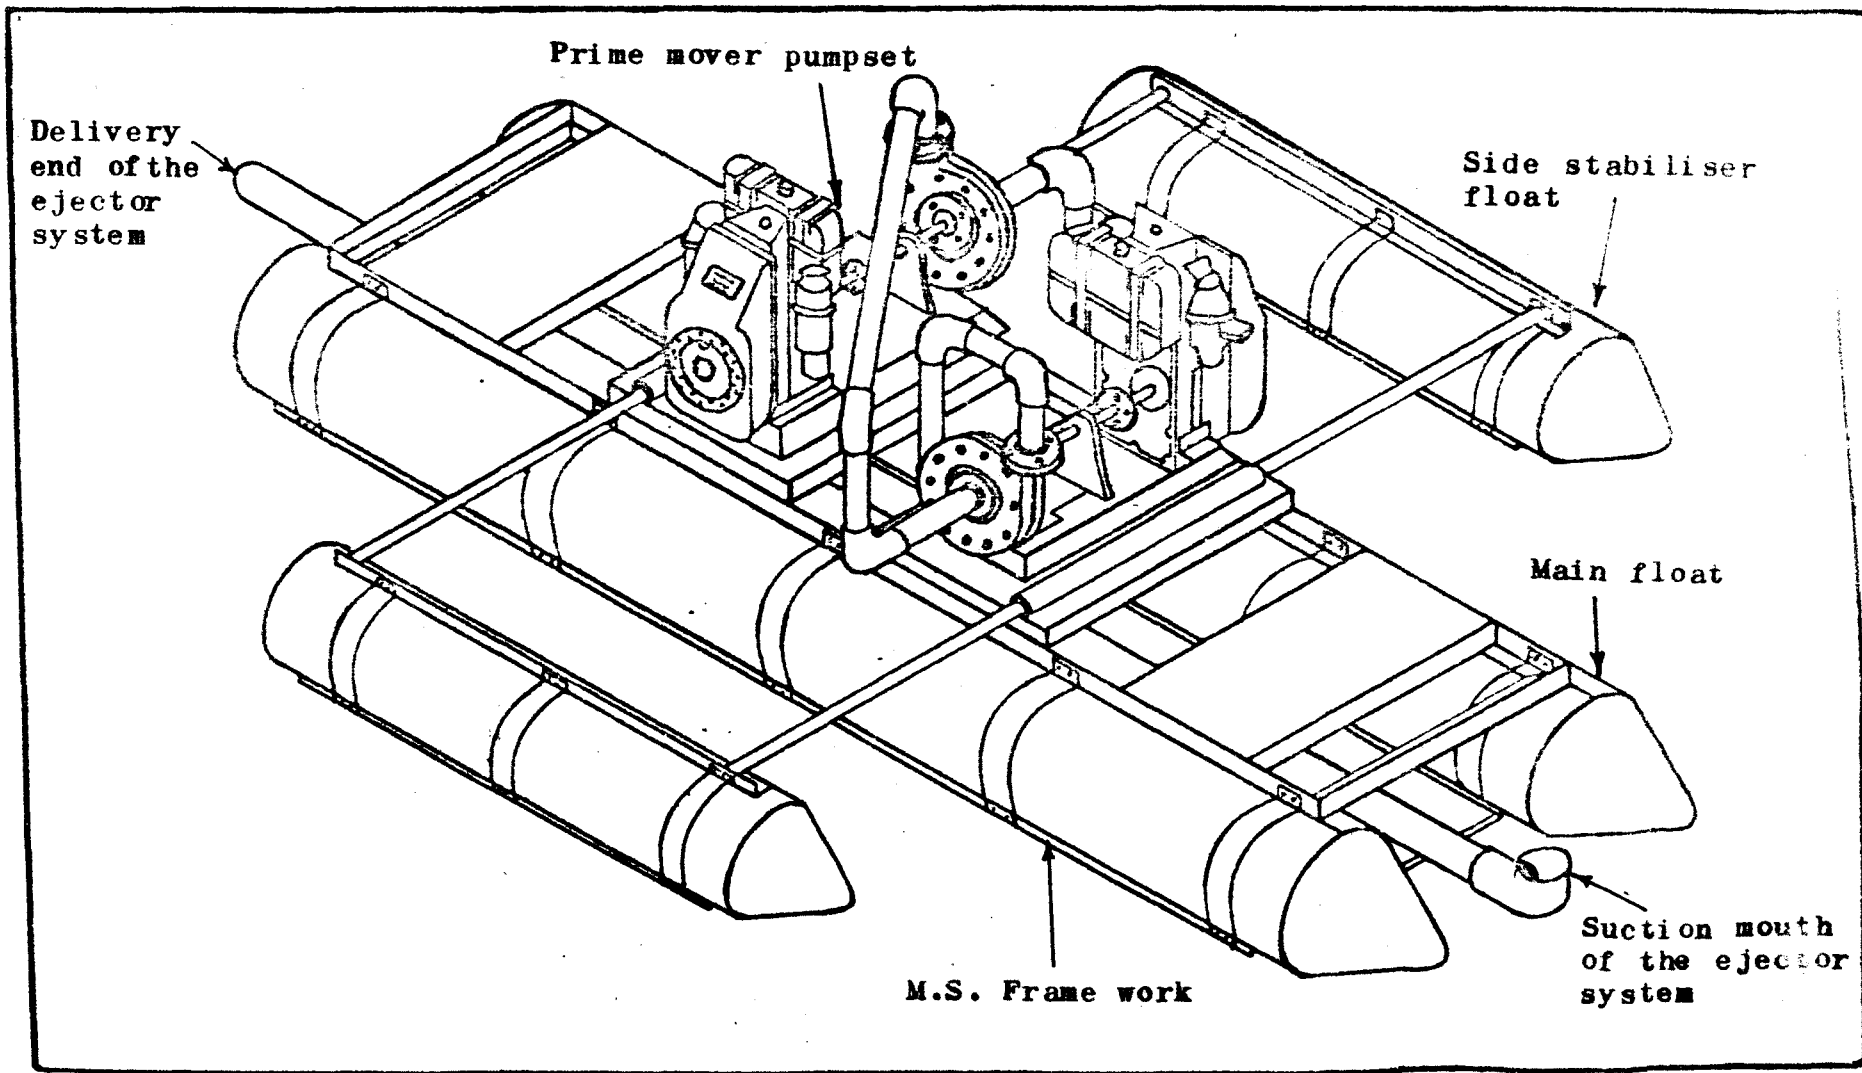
Prototype Salvinia Harvesting Machine - Isometric view.
